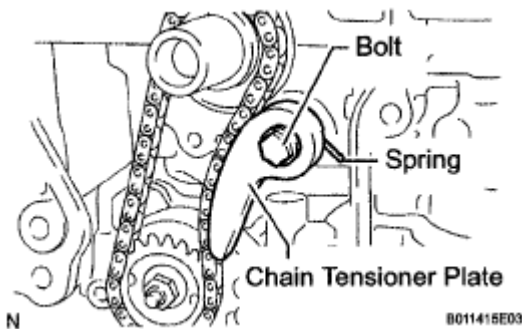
Identifying Chain Tensioner Plate, Spring And Bolts
